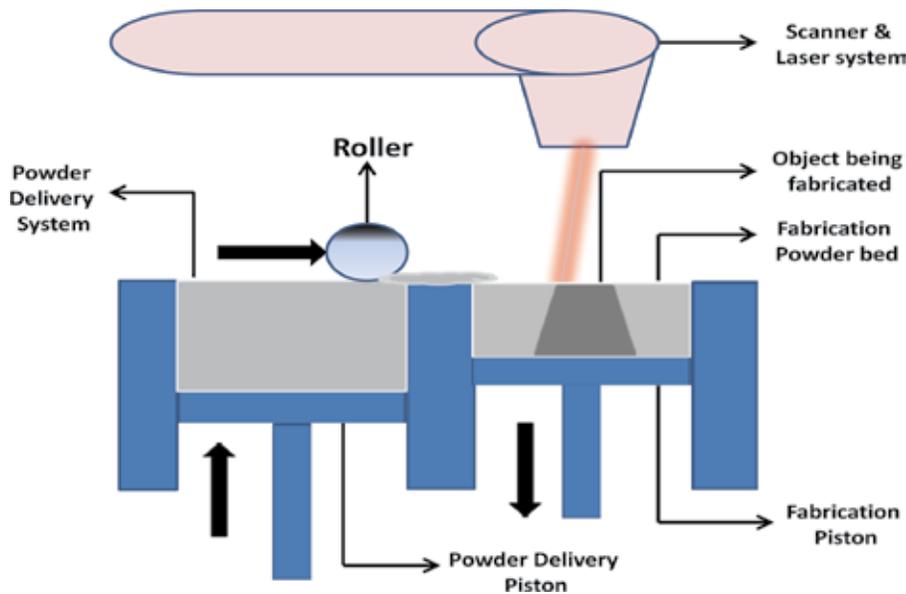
Diagrammatic Representation of the Parts of a DMLS machine.
